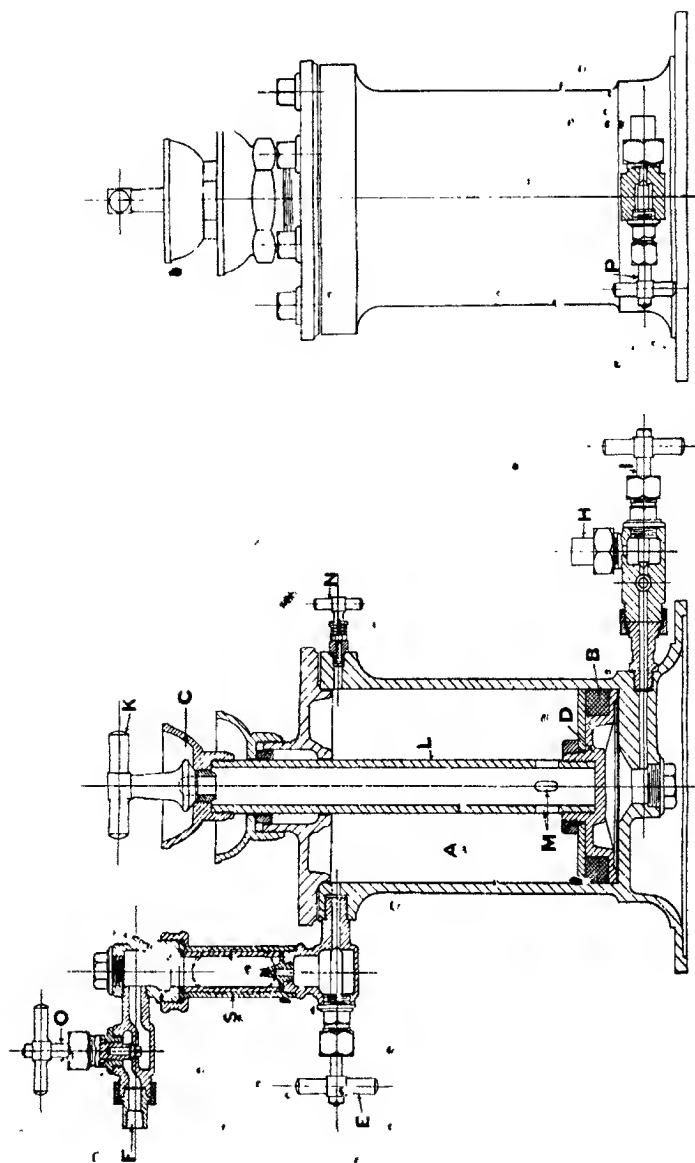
Winn's Piston Sight-feed Lubricator.
